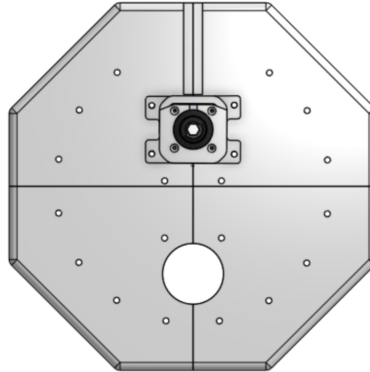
Auger motor assembly secured to the base plate using four #10-32 1" bolts and matching nuts.
